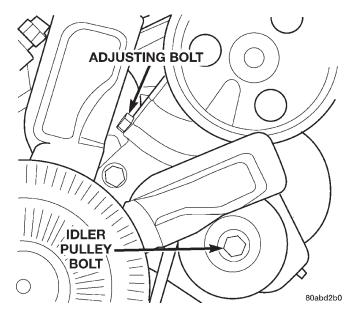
Power Steering Pump Bracket and Idler Pulley
